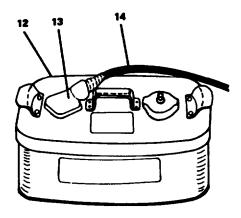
Outboard Motor (Sheet 2 of 2).
